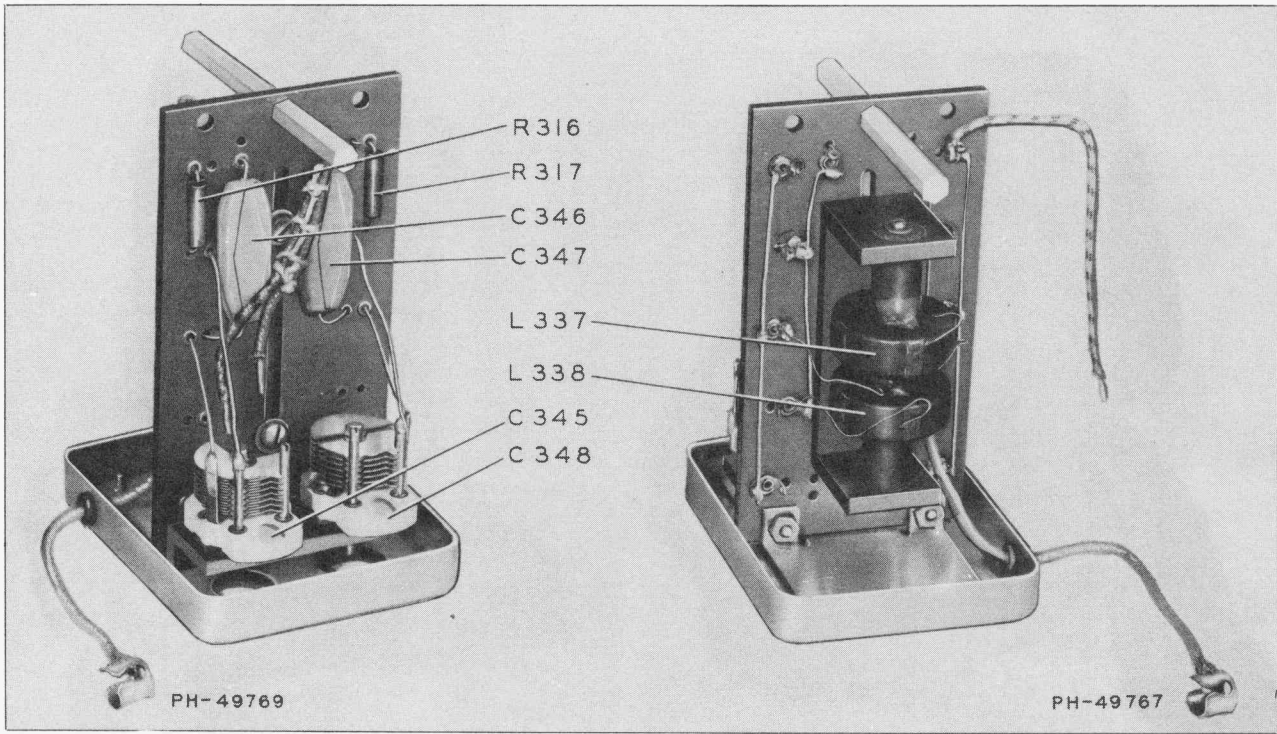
Typical Circuit Assembly (Third Stage, 50 KC Section, Front and Rear Views)
